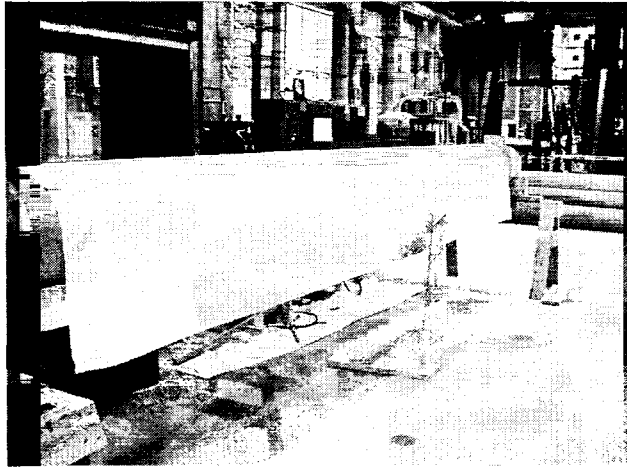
Dry Fabrics and Peel Ply on the PVC Mold
